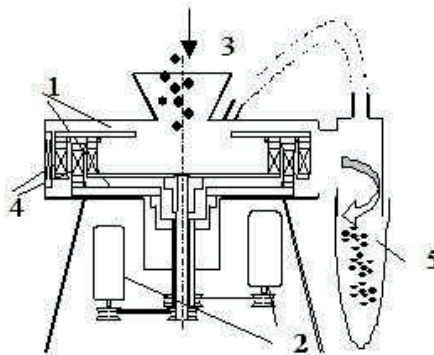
Schematic representation of two-rotor disintegrator DS-350: 1 – rotors; 2 – electric drives; 3 – feed supply; 4 – grinding elements; 5 – output.
